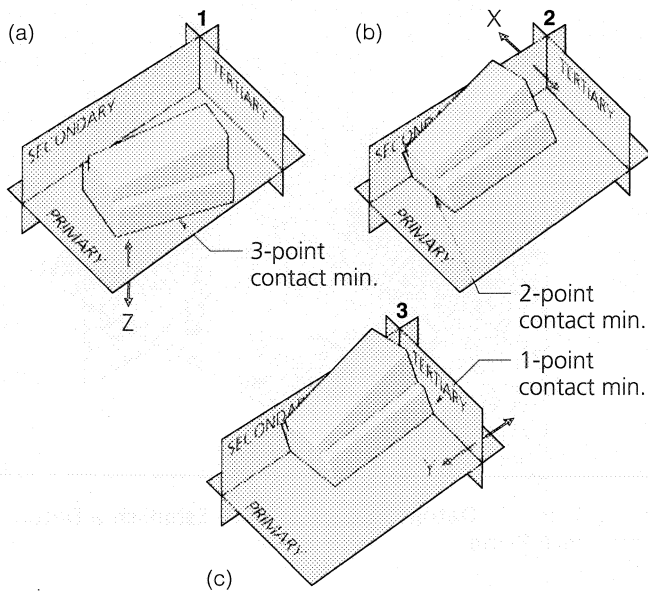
Datum Reference Frame—Datum Precedence
